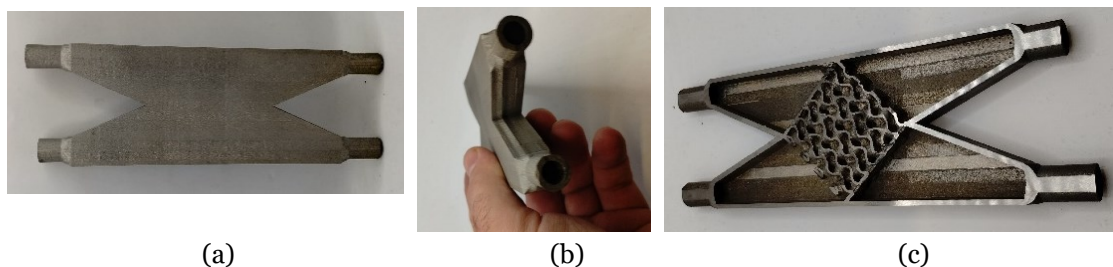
Printed metal prototypes. (a) and (b): the final version to be used for the tests and (c): the cross-section showing the internal TPMS structure.
